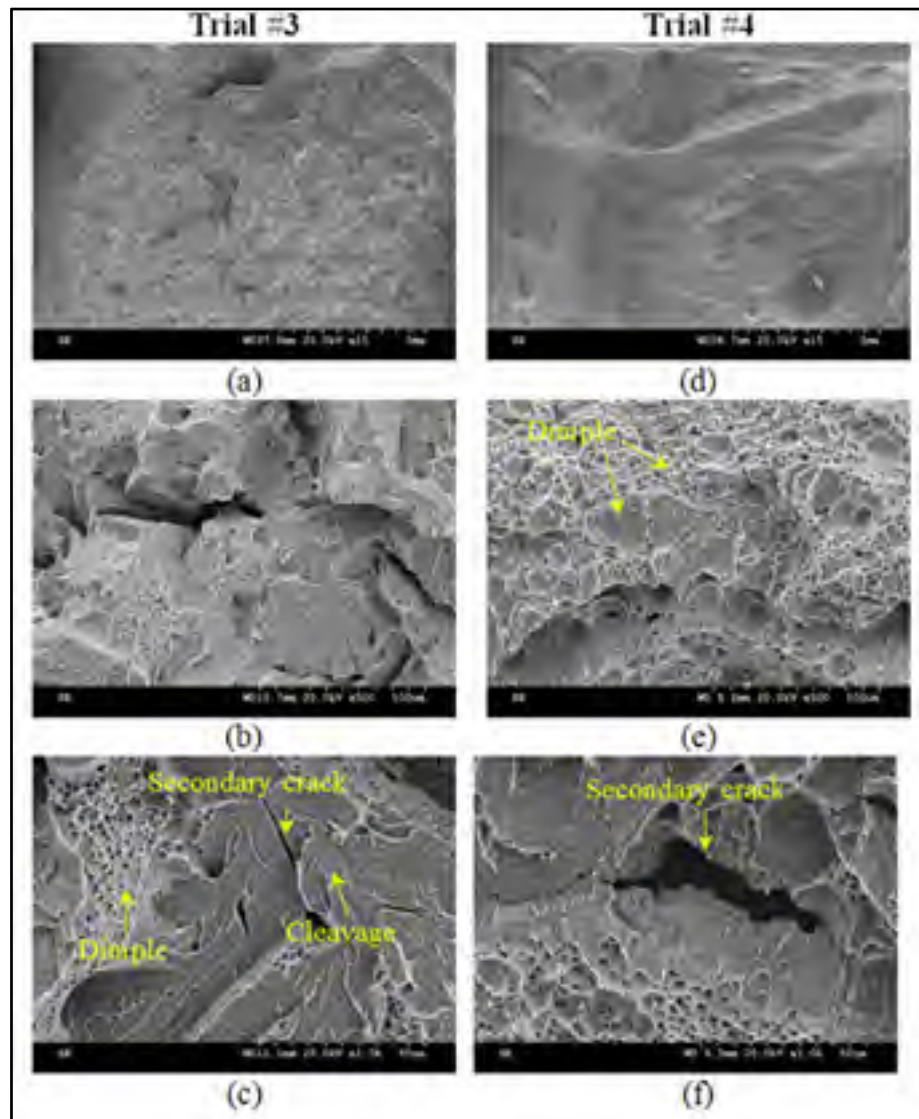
Charpy fracture surfaces of root pass: trial#3 (a-c) and trial #4 (d-f)
